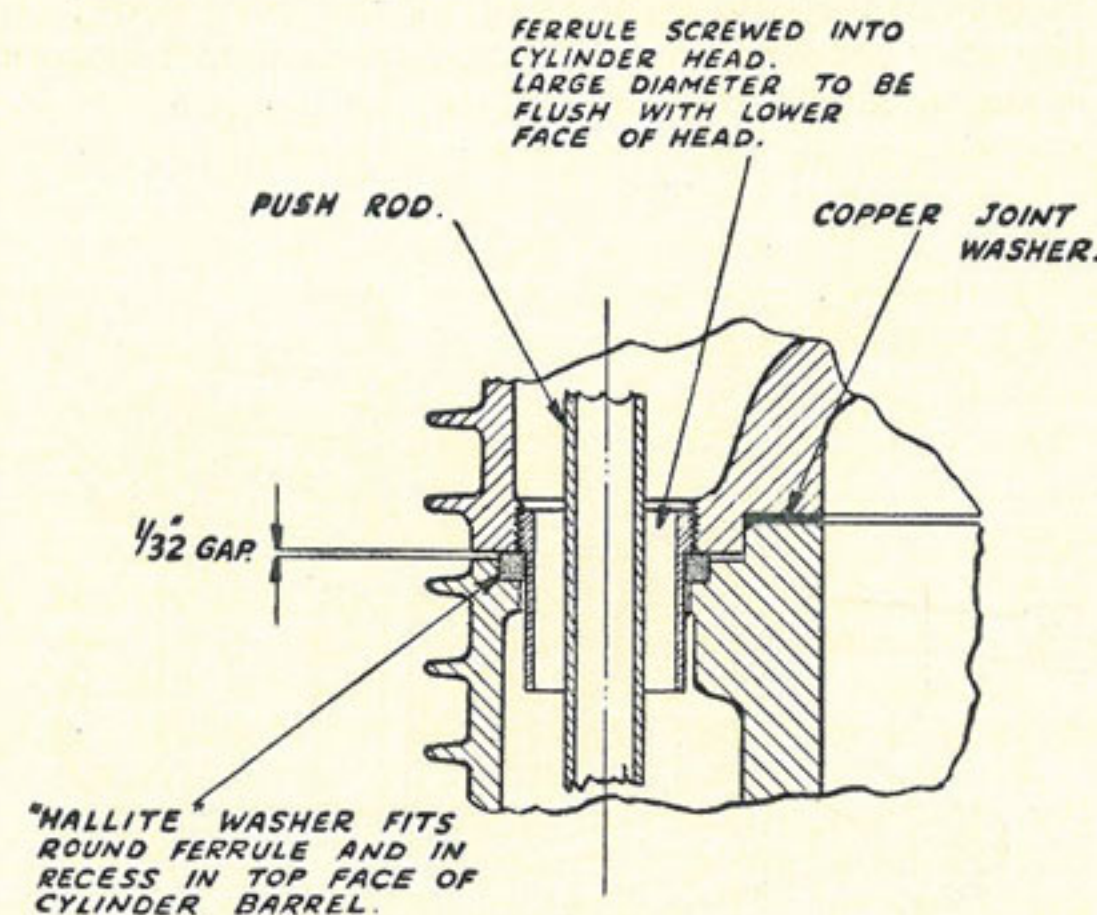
Detail of Joints in Push Rod Enclosure Tubes.
